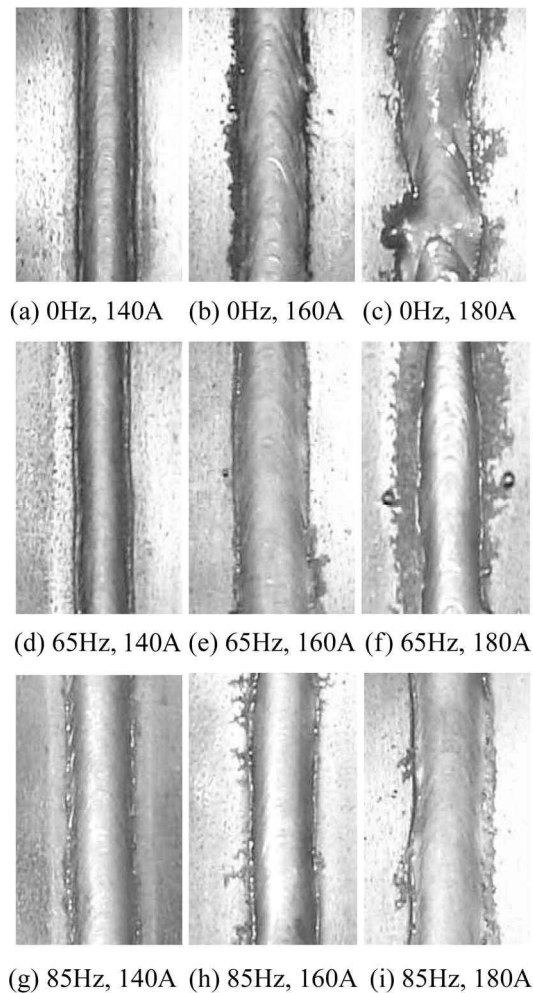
Macroscopic appearance of the weld beads produced at a wire-feeding rate of 60 mm/s under different welding currents and different wire oscillation frequencies
